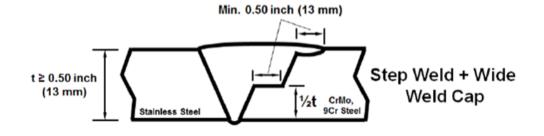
Step Bevel for Welding P91 to Austenitic Stainless or Nickel-base Alloys
